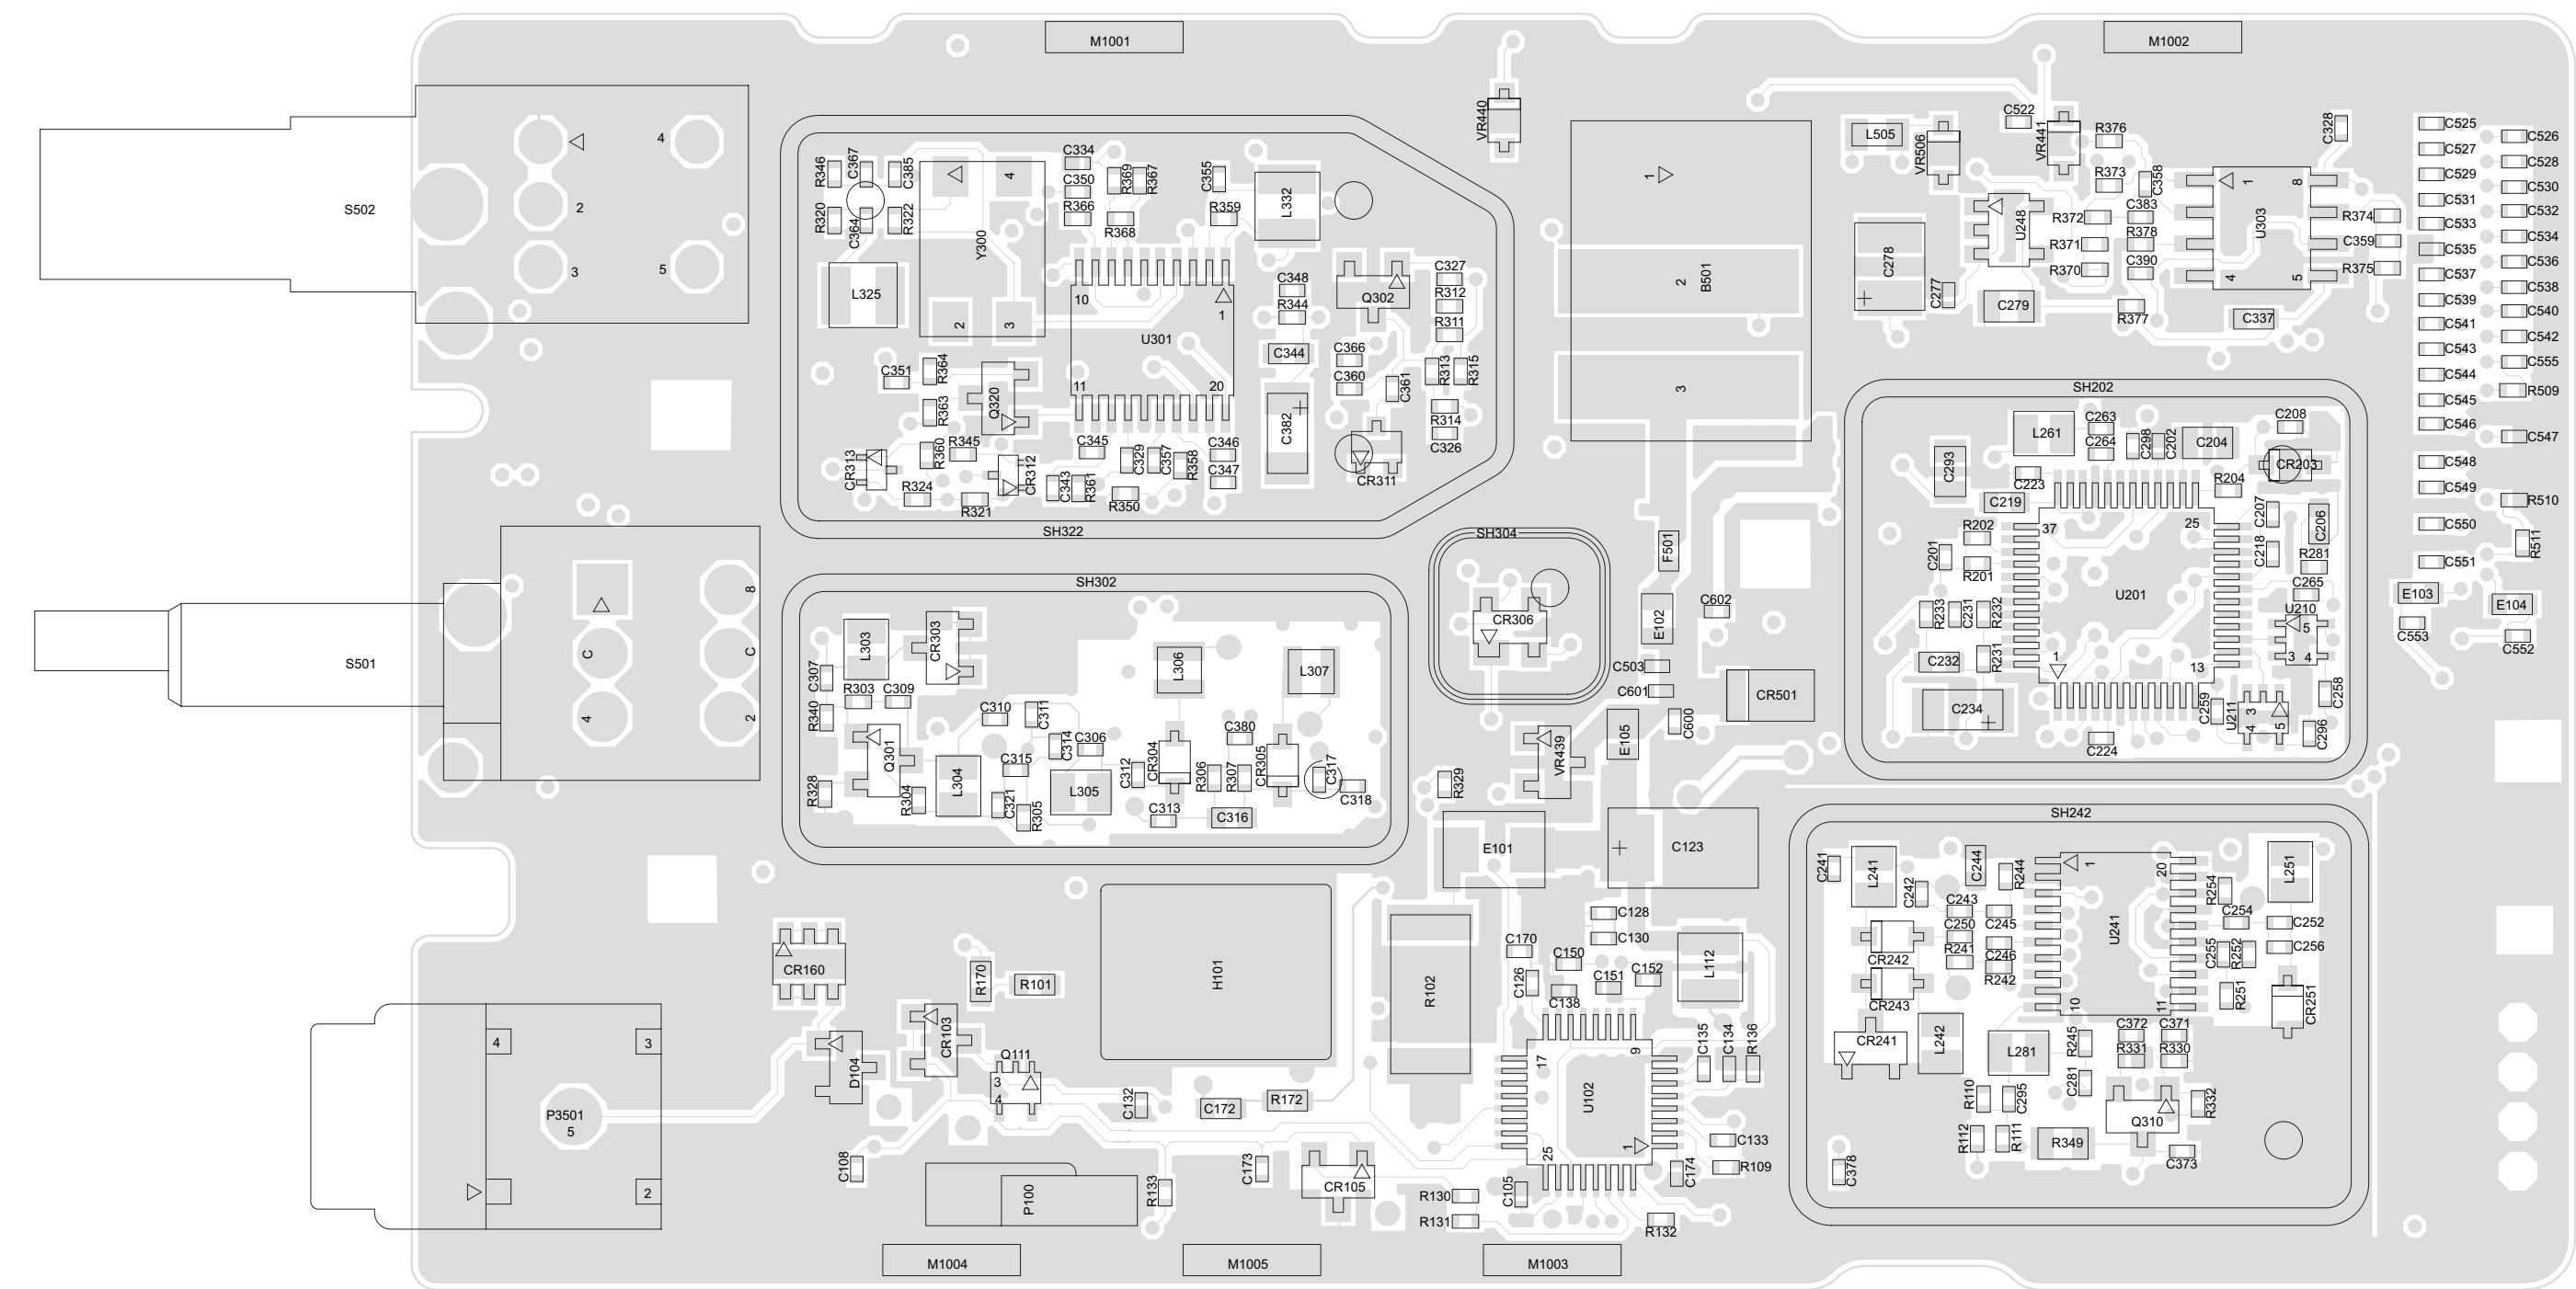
UHF Band 2 (450-527MHz) Main Board Bottom Side PCB No. 8471475L01
